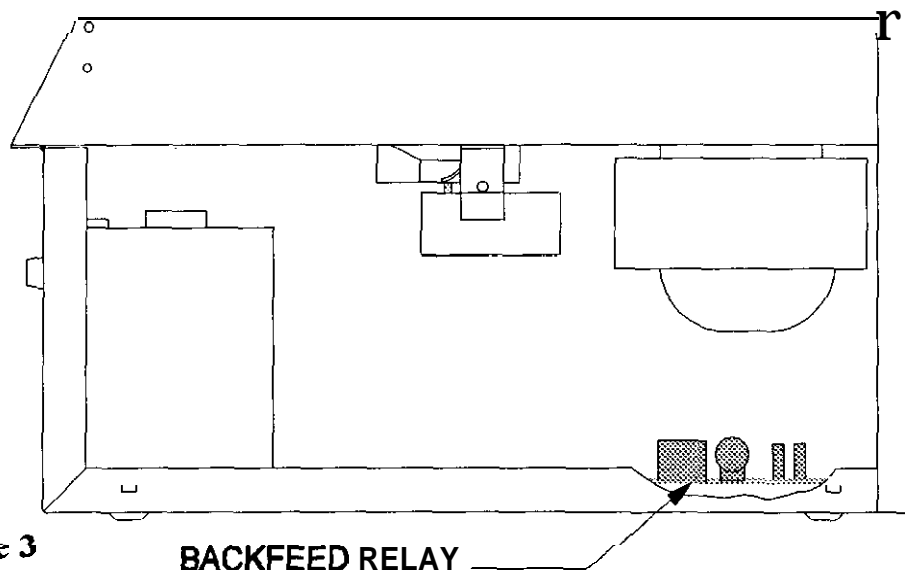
BACKFEED RELAY DRIVER BOARD
